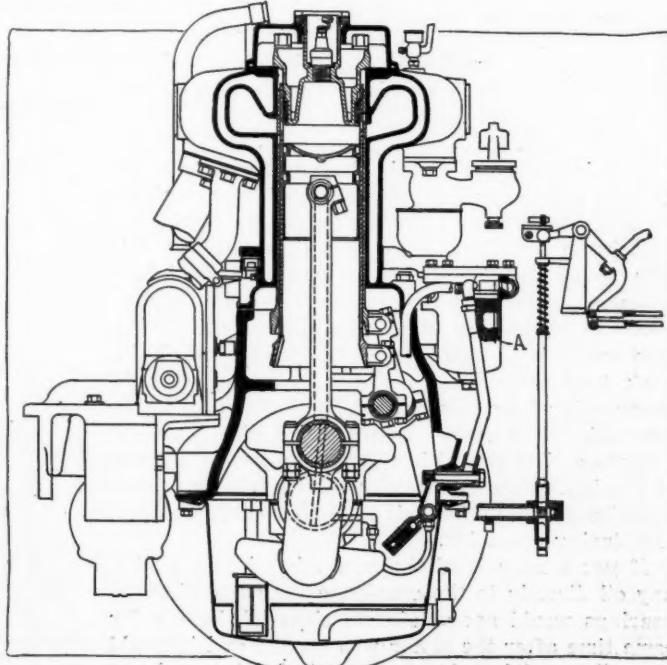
Sectional view of the Knight engine as made by the Stearns company.
